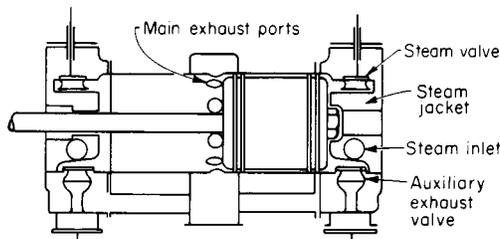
Noncondensing uniflow engine cylinder, with auxiliary exhaust valves.
